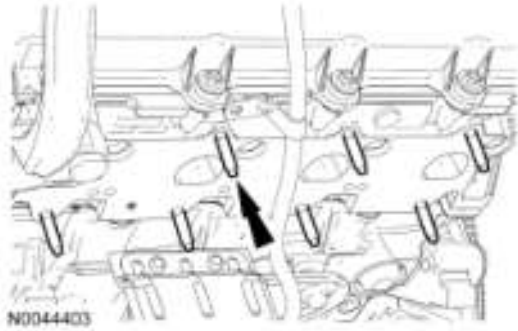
Locating LH Exhaust Manifold-To-Cylinder Head Studs
